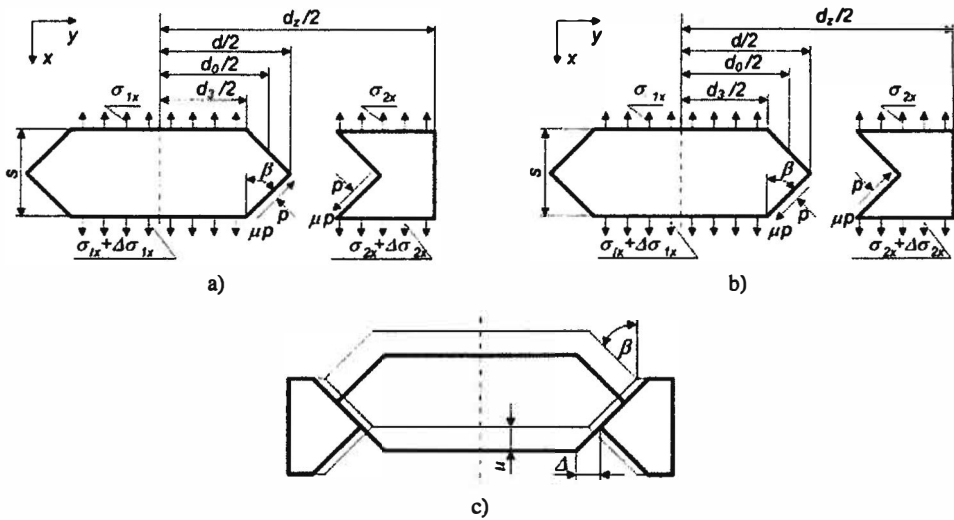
Model 1 – segment of screw joint: axial loading; axial releasing; dislocation of the segment of screw joint.
